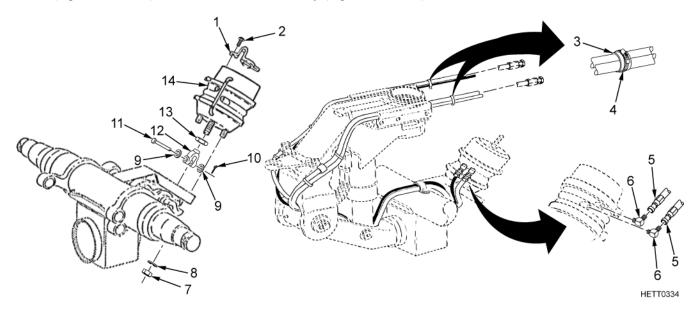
Location C, Brake Chamber Assembly, Typical 10 Places.
